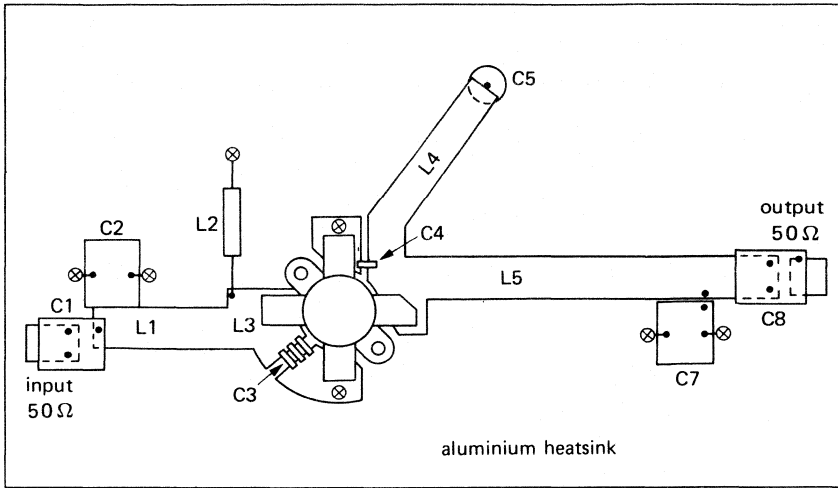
Component layout on an aluminium heatsink for 150 MHz test circuit. ⊗ Earthing bolts.
